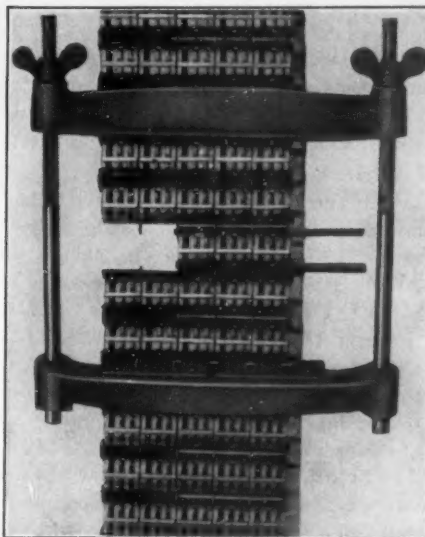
METHOD OF USING THE BELT TAKE-UP
